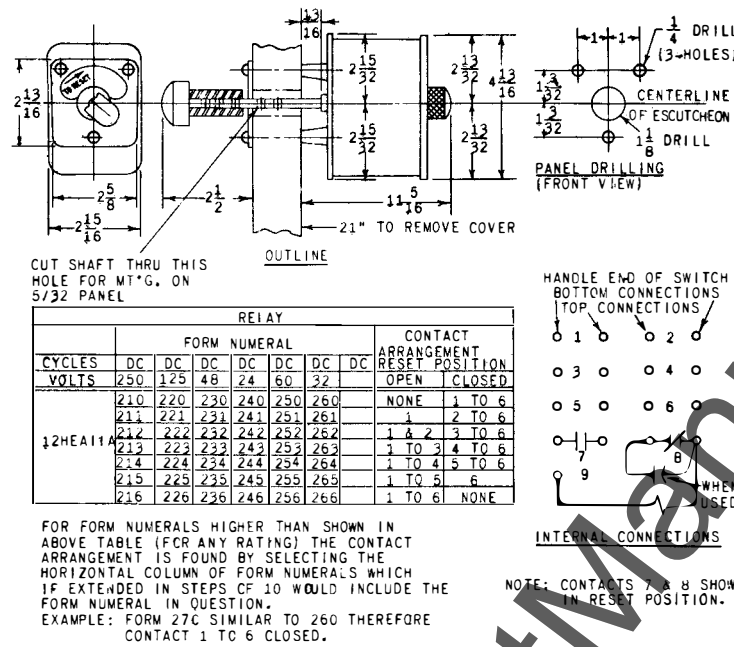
Outline, Panel Drilling And Internal Connections For Type HEA11A Relay
